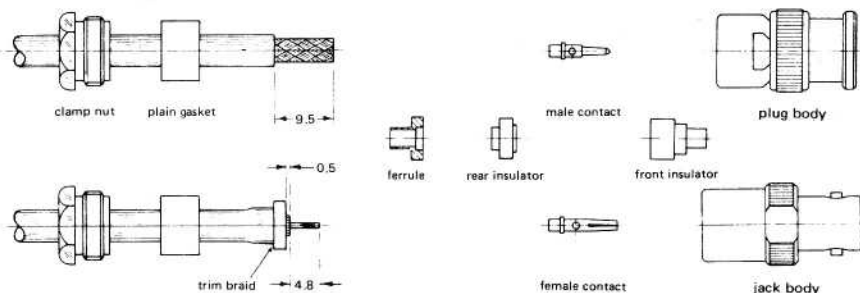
Plugs and jacks: captive contact, pressure sleeve cable clamp
